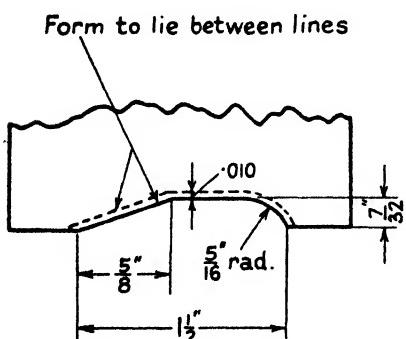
DIMENSIONING THE LIMITS OF A FORM
